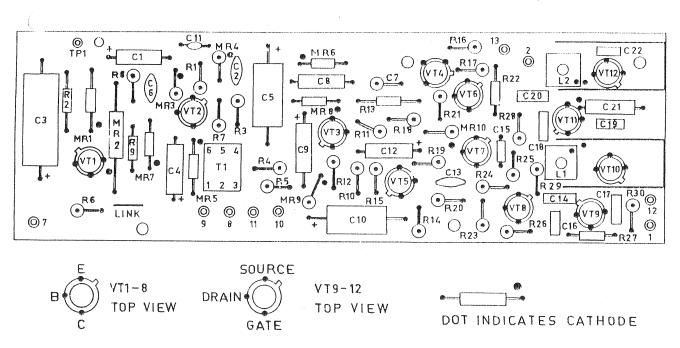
SYNTHESIZER GATING BOARD 10-6CB1 - COMPONENT LAYOUT
